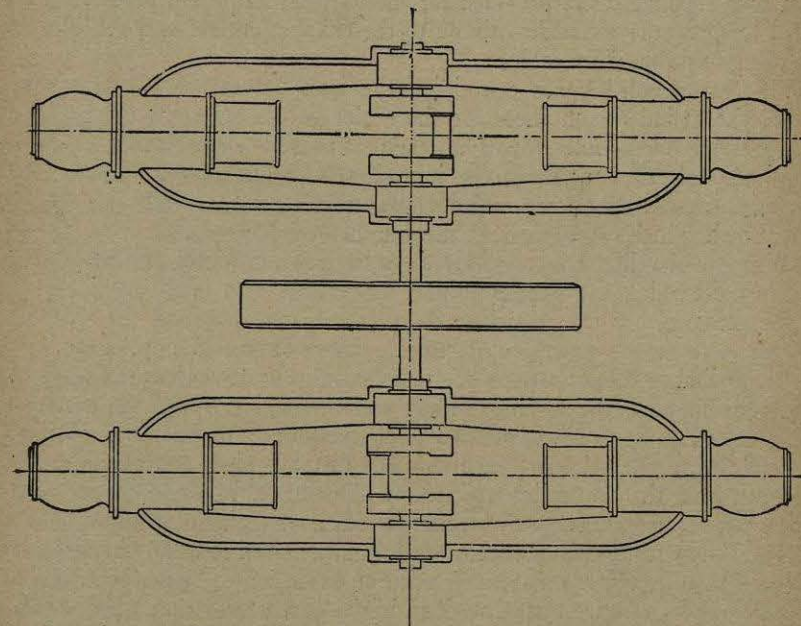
Four-cylinder Four-cycle Gas Engine.
